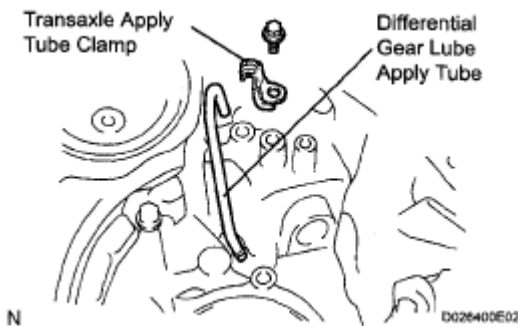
Identifying Transaxle Apply Tube Clamp And Differential Gear Lube Apply Tube
